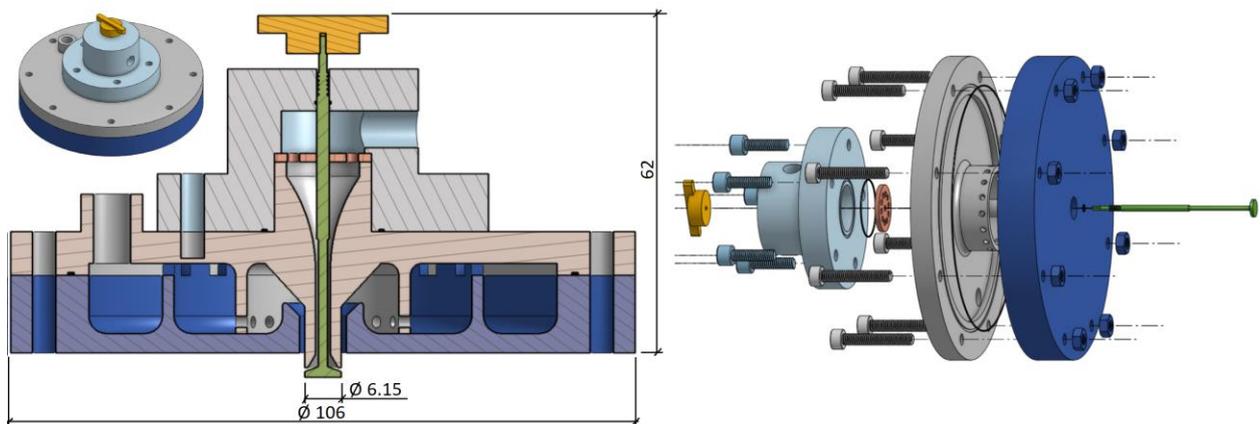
Cut view and 3D views of the pintle injector prototype.
